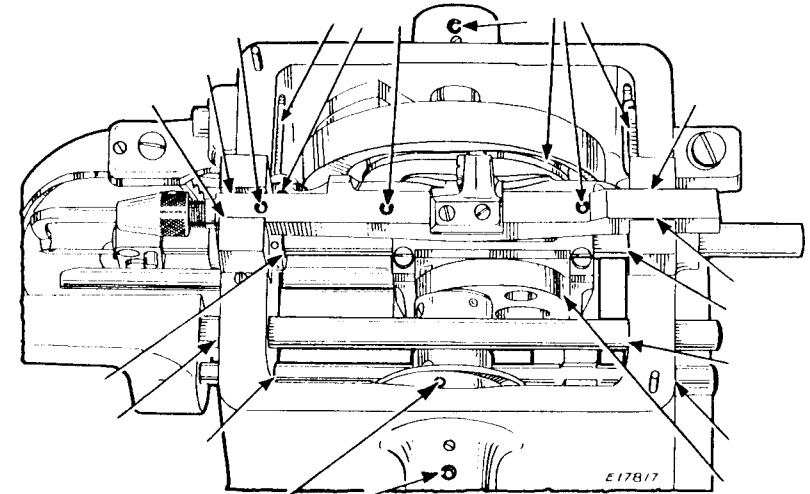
Oiling Points on Top of Machines 176-33 and 176-34
